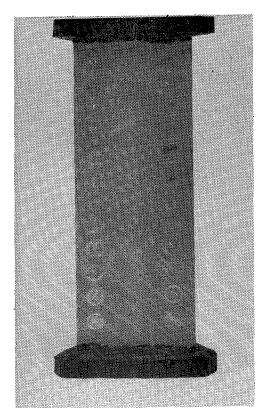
Skin Side of Spotwelded Crippling Specimen. (Neg. 126907B)
